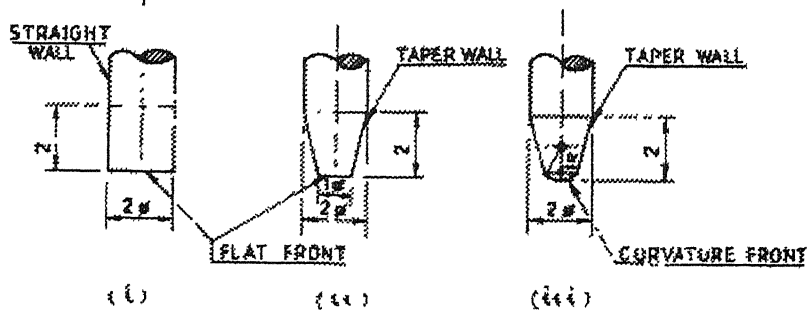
7 Different geometrical shapes of the tool tip (dimensions in mm) [10]
